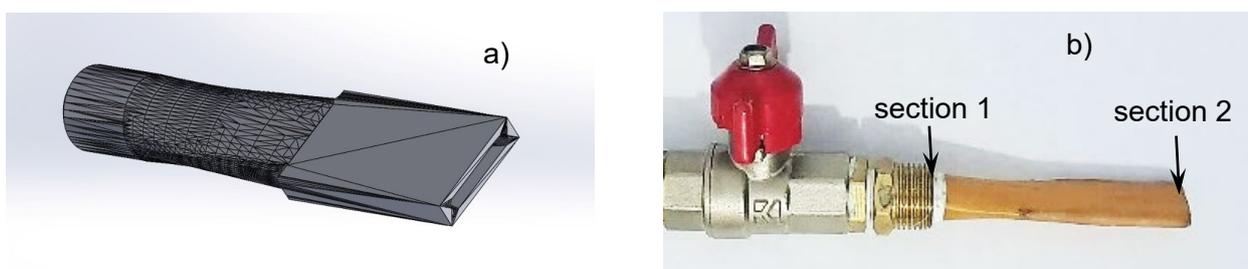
Sketch (a) and view of the 3D-printed (b) jet nozzle
